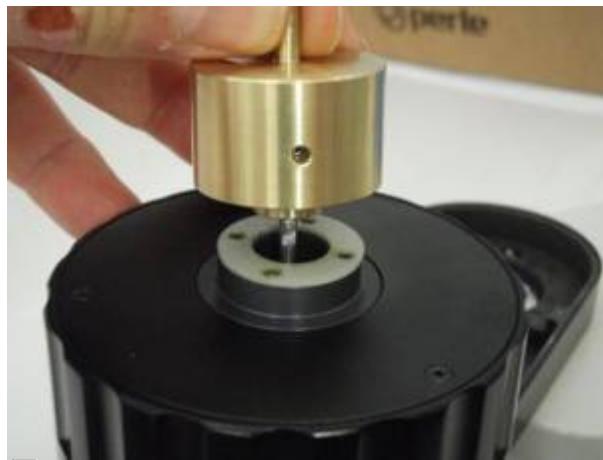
Install plate as shown with setscrew lined up with flat on fine focus shaft.
